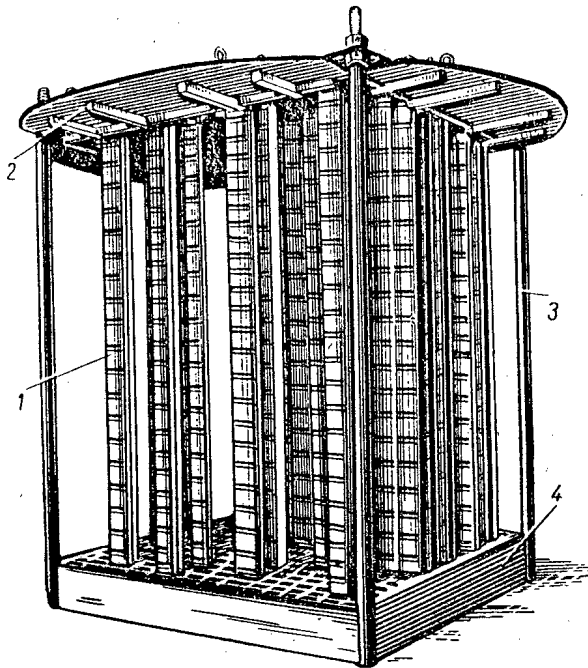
Reactor zone (with section of fuel-element assembly removed). 1) Fuel-element assembly; 2) upper baffle; 3) fastening rod; 4) lower lattice.
